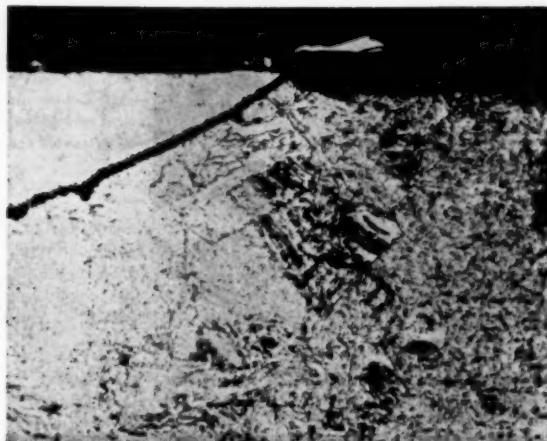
WELDED JUNCTION AT SURFACE OF THIRD BOAT SAMPLE REMOVED FROM PHILIP SPORN UNIT NO. 1 TEST VESSEL AFTER 102 CYCLES; $\times 250$
